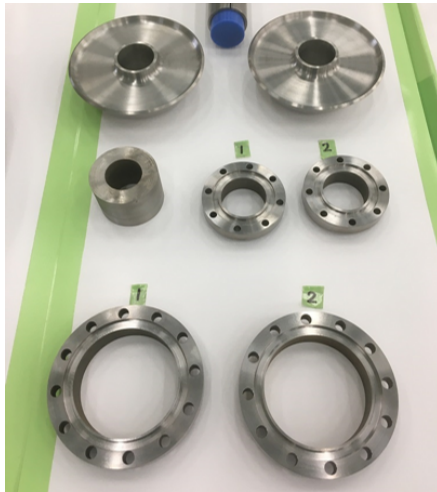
Spoke cavity parts machined from the ingots of pure-Nb or Nb-Ti.
